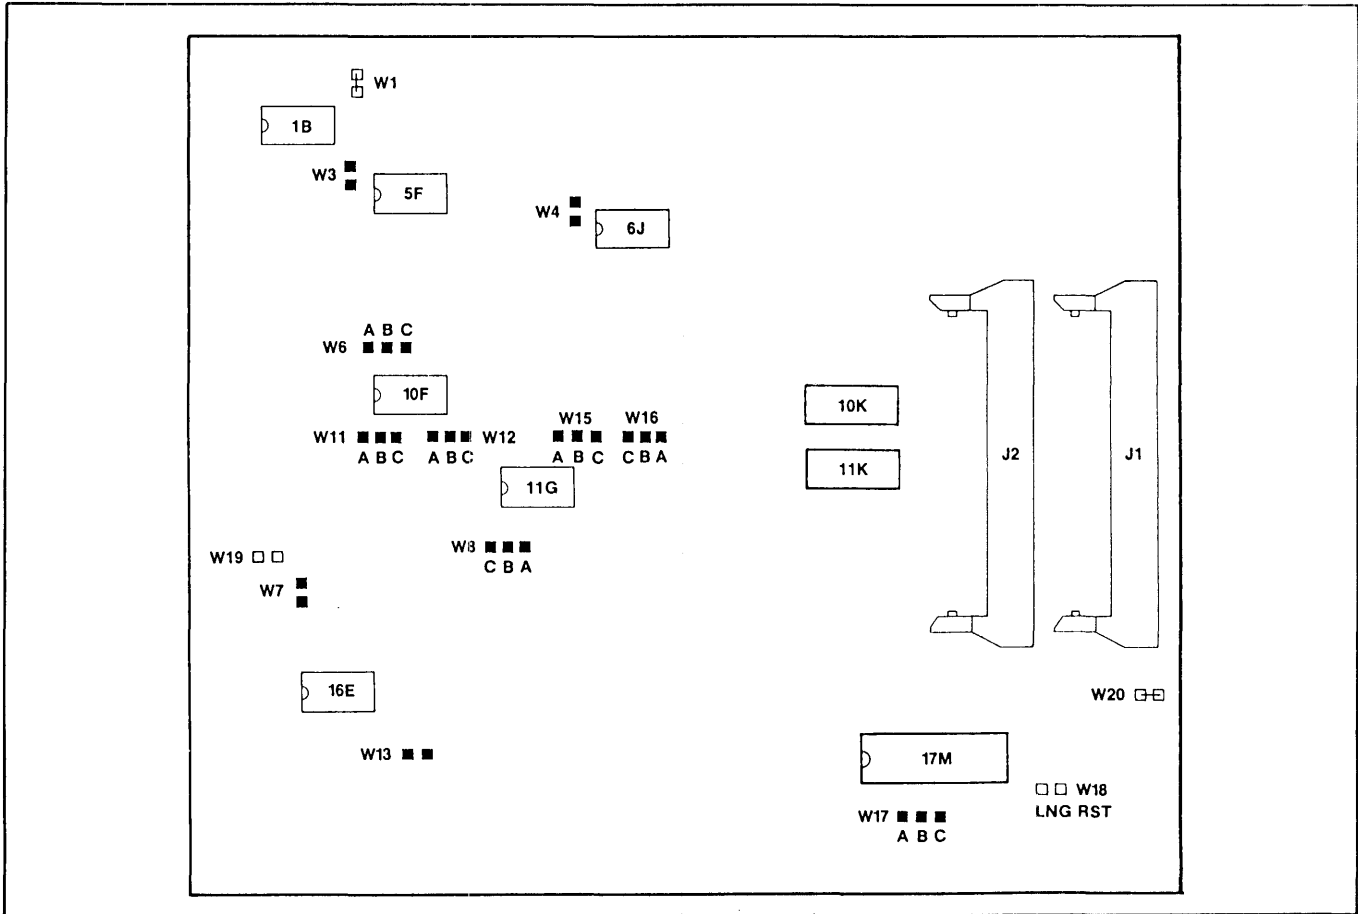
Jumper Locations for PCB Assembly 200248-01/02
